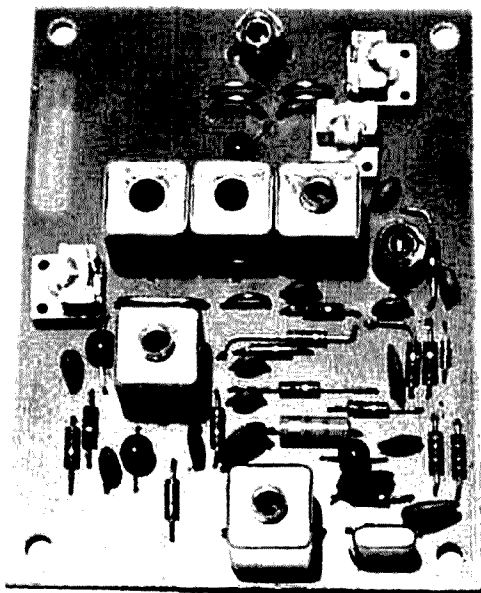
Component layout for the uhf converter. Circuit board is shown in fig. 3.
